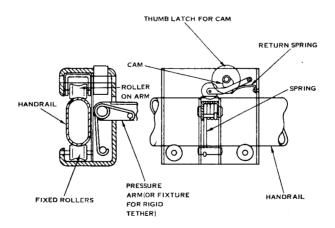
SLIDE ASSEMBLY RIGID TETHER
